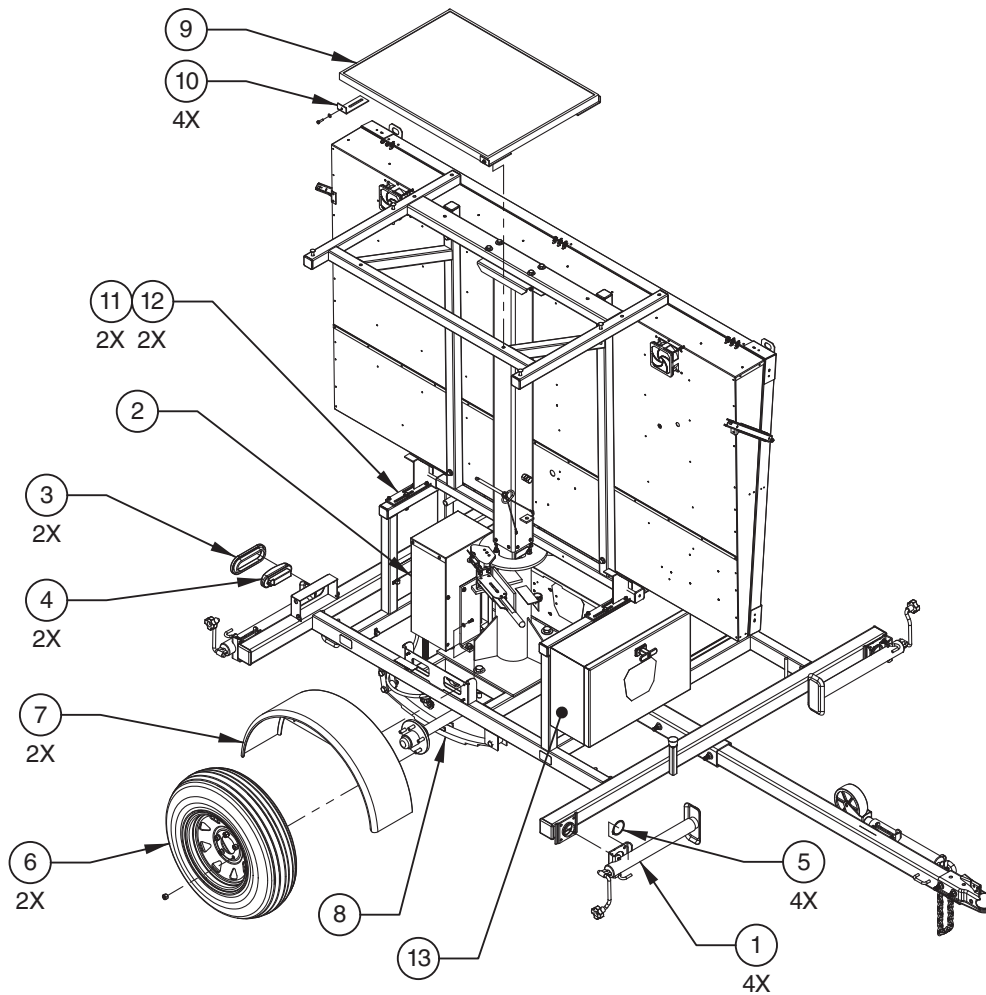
Parts drawing: Removable drawbar assembly for full-size sign
